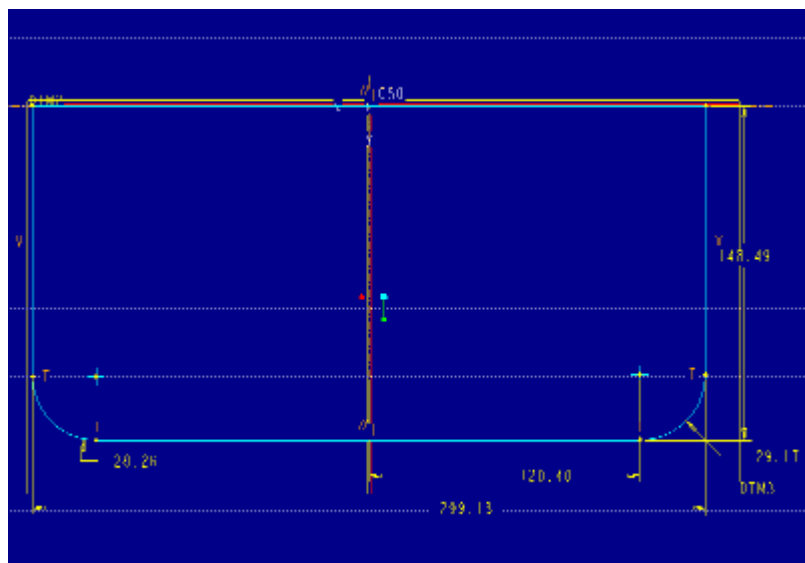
Mold Insert Cross-Section Geometry and Dimensions.
